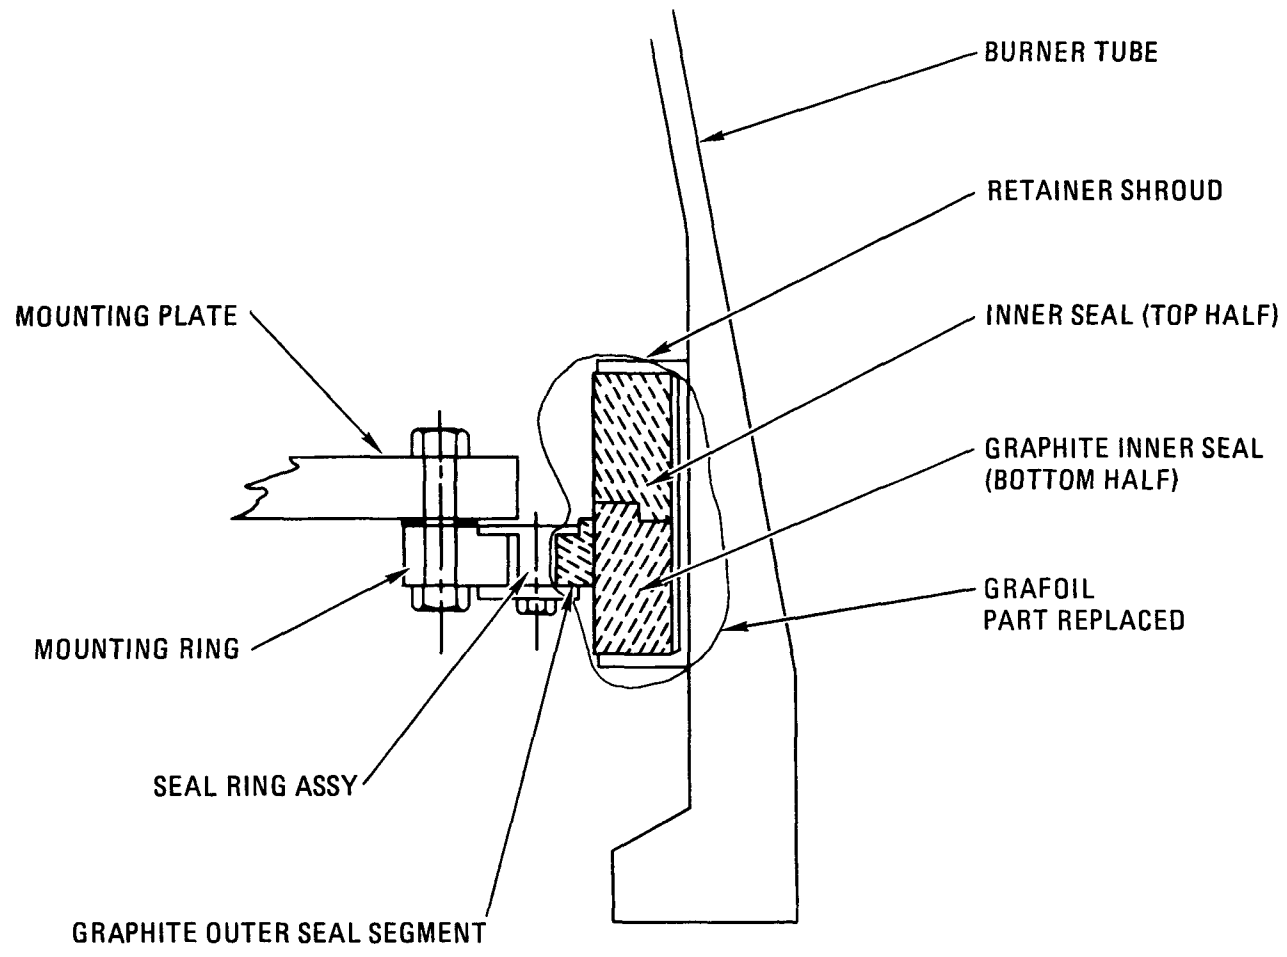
0.40-m primary burner modified lower seal assembly with inner and outer seals of solid graphite
